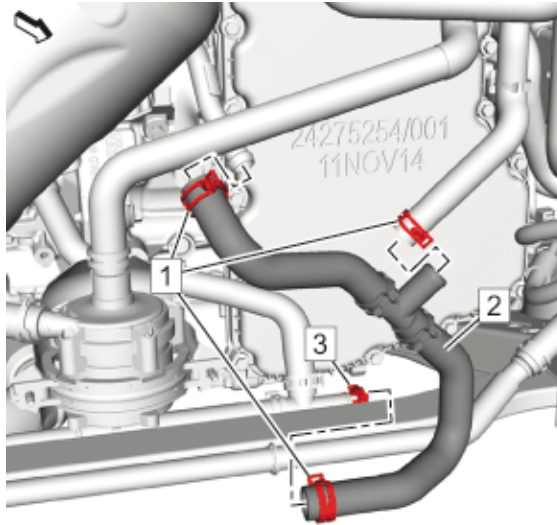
Radiator Inlet Hose, Hose Clamps And Retainer
